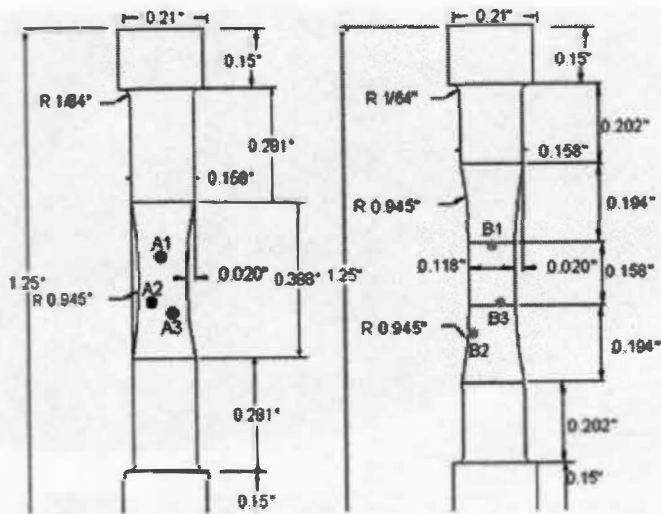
Relative Locations of Crack Initiation/ Fracture Surface for Geometry A (Left) and Geometry B (Right).
